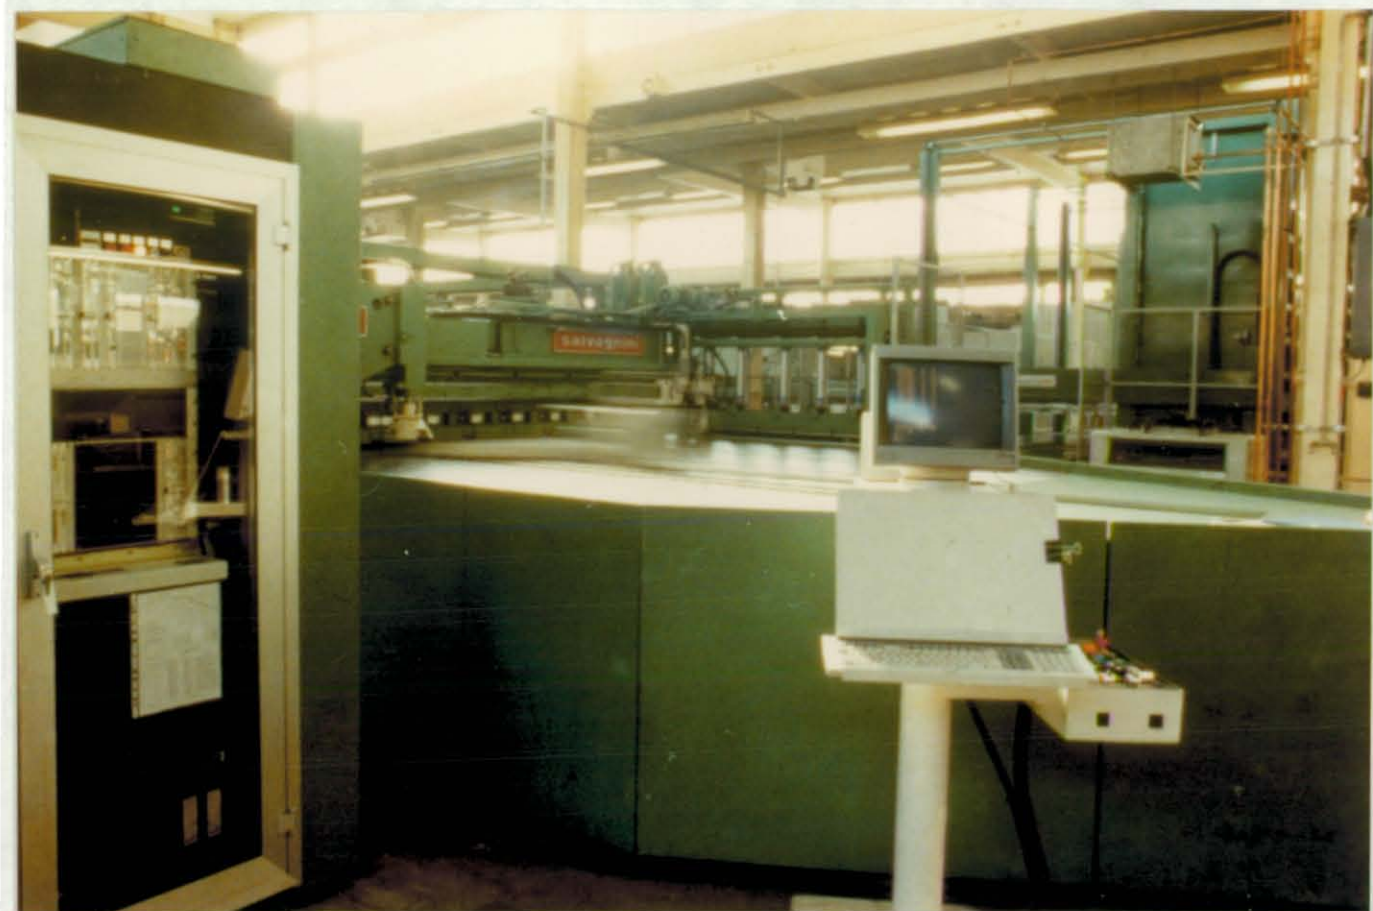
View showing control panel, table, Tivox, and transfer mechanism of Salvagnini Shear.
